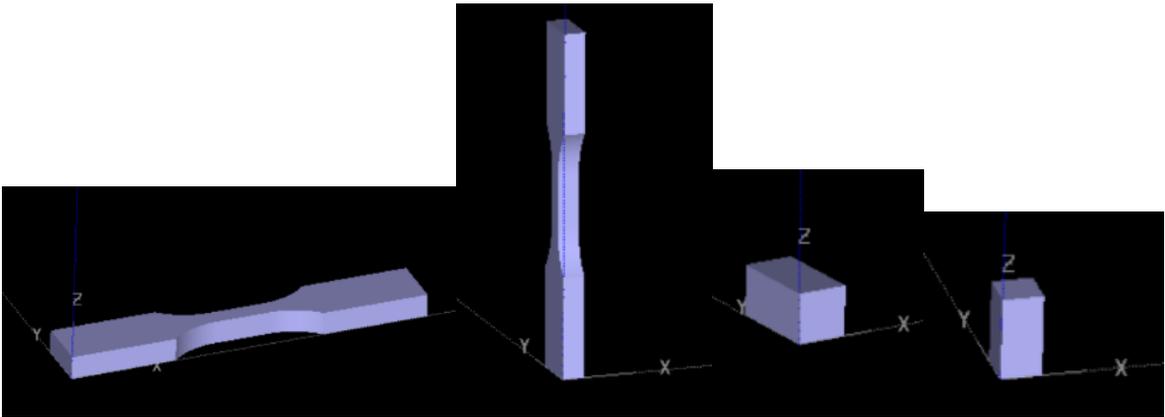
Orientation set-up of printing for tensile and compression specimen.
